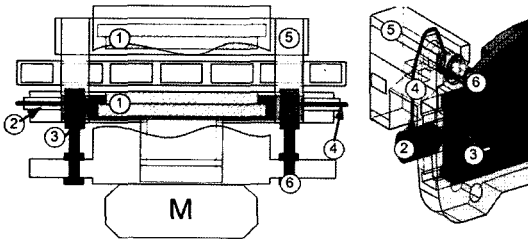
The EMB caliper with hydraulic chambers⁹⁾
